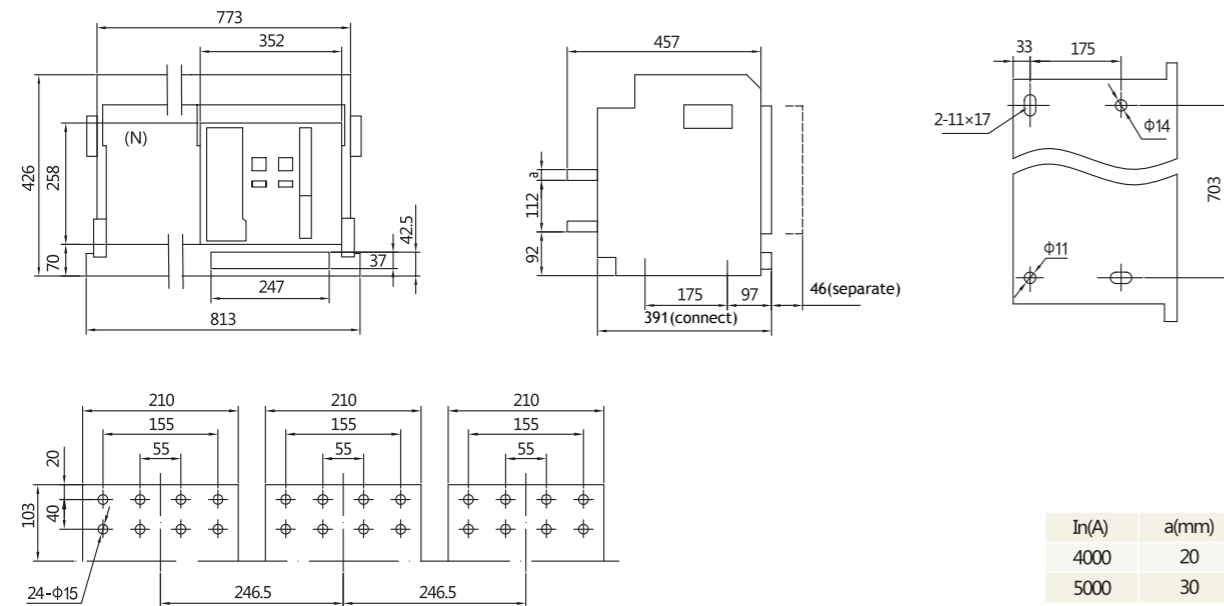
RDSW6-6300/4P (In=4000A, 5000A)drawer type install and shape dimension
